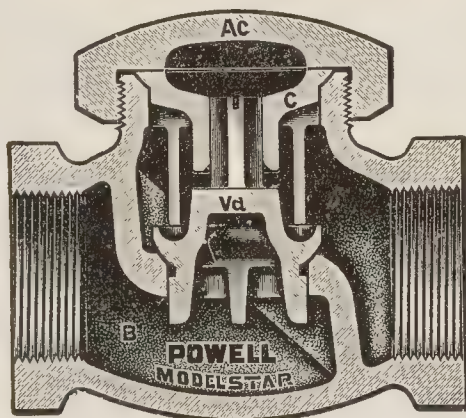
,163.—Powell disc check valve. The check disc *Vd*, has integrally cast wing guides, which snugly engage within the guide *C*, auxiliary guides being provided below the disc. *To regrind*, remove bonnet *Ac*, lift out guide *C*, place a little fine sand or ground glass and water on the disc face, replace same in the body *B*, and apply a screwdriver to slot in disc stem. Rotate back and forth until a good bearing is obtained, then carefully wipe off the ground glass or sand and replace valve guide *C*, and screw on bonnet.
